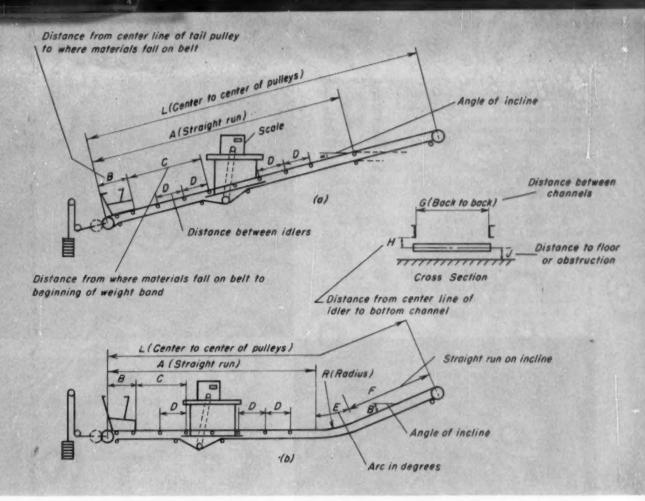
Include installation dimensions; show location of drive and take-up and direction of travel.
